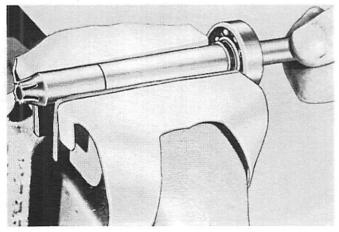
Removing Drive Shaft Ball Bearing Page 88 Master Service Manual
